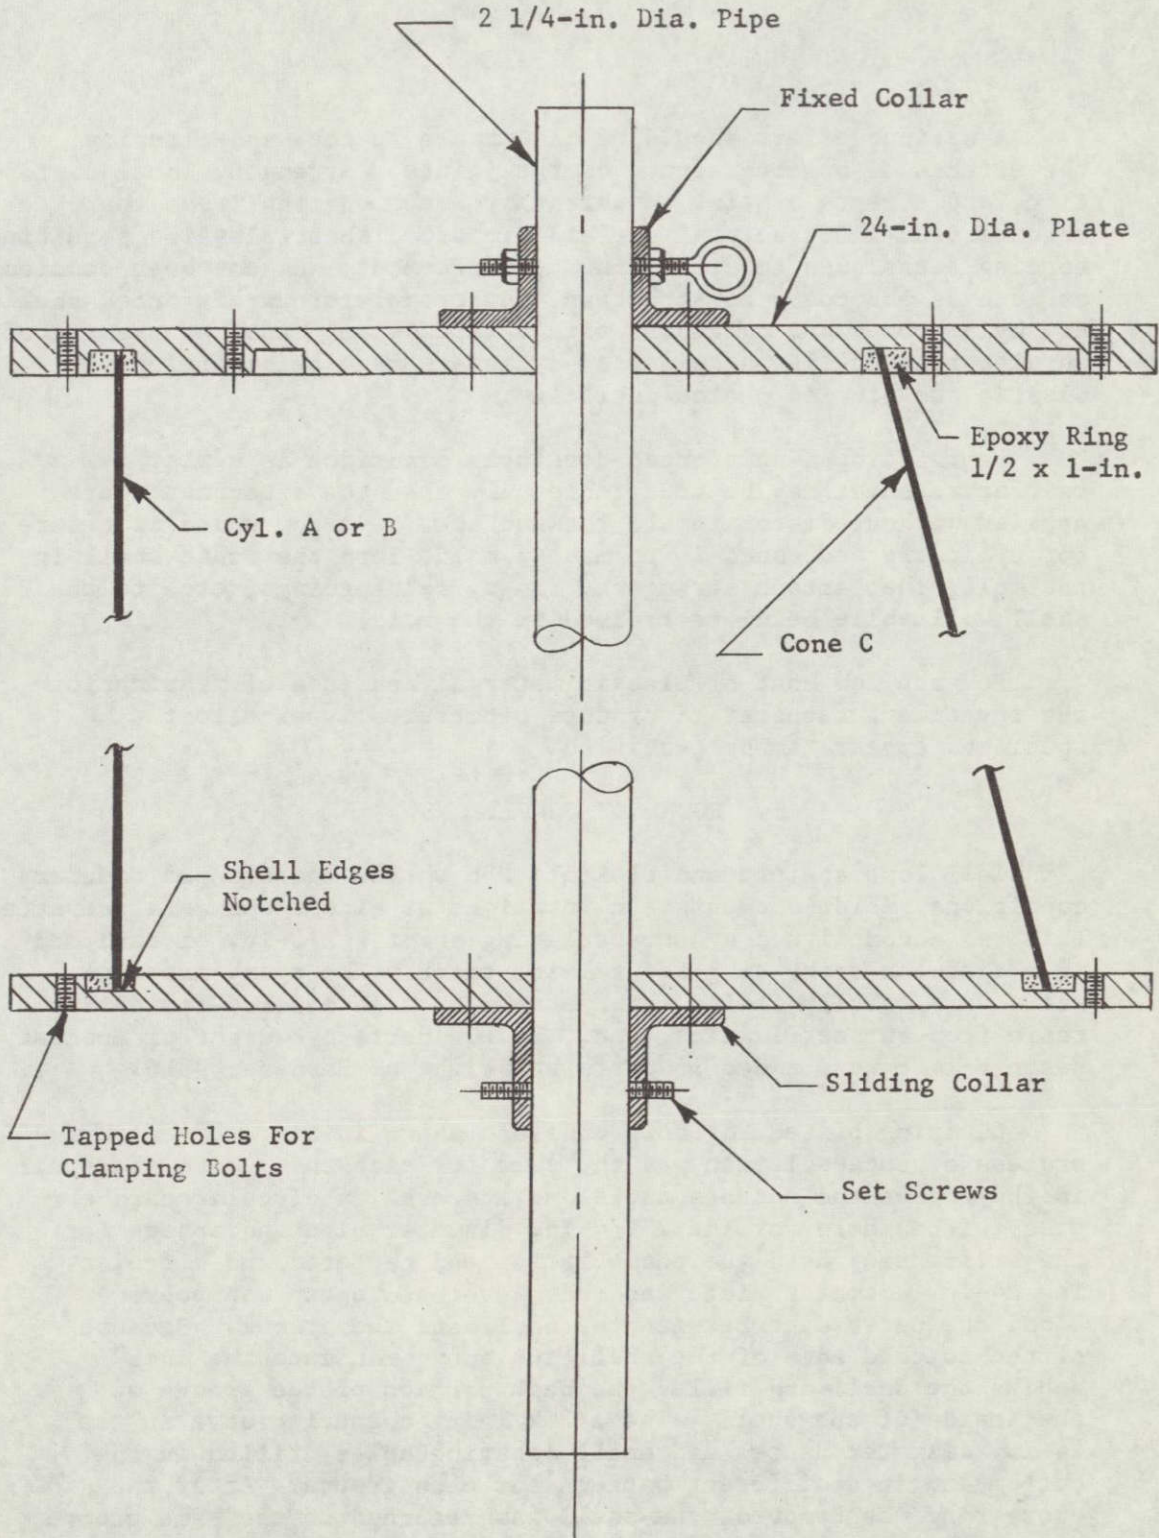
Clamping Plates Showing Cylinder on Left Side and Cone on Right Side
